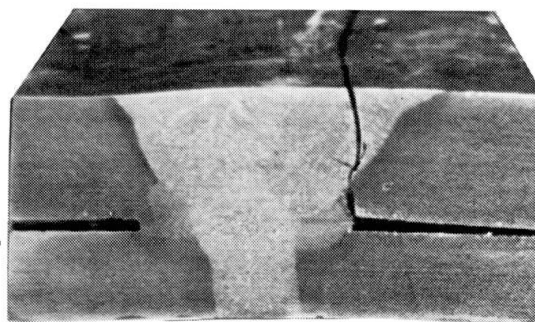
Fatigue fracture of double plate beam flange joint
